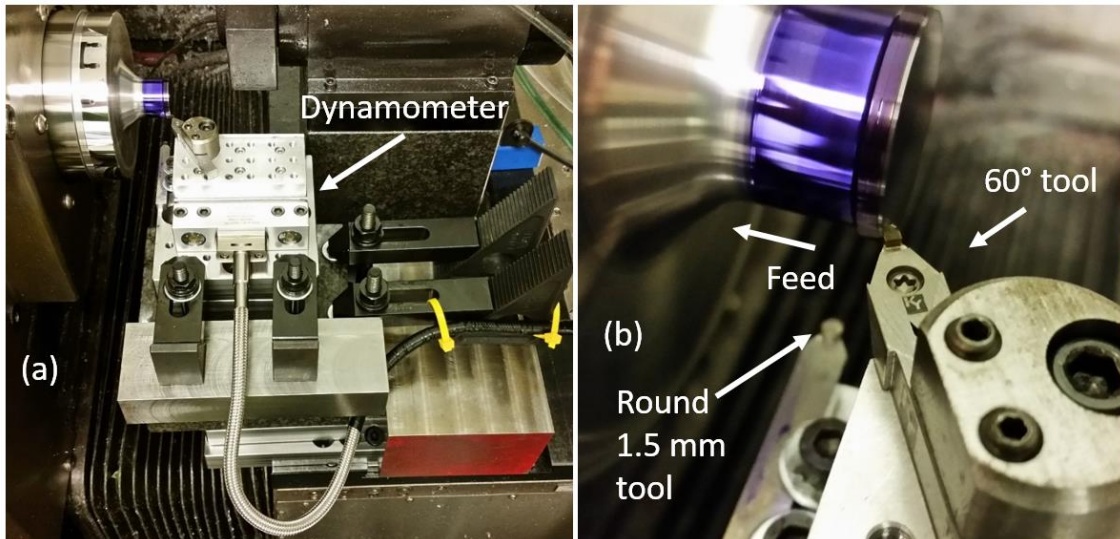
(a) Test configuration for orthogonal turning and (b) enlarged view of tool, specimen, and cutting zone.
